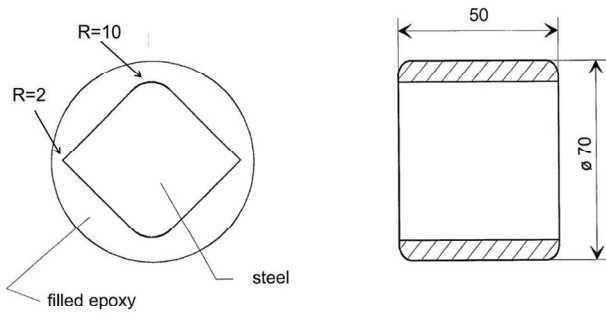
A specimen for Crack Test [CIBA, 1997]. (Sharp edges of steel insert have $R=2$ radii, which serve as crack initiators).
